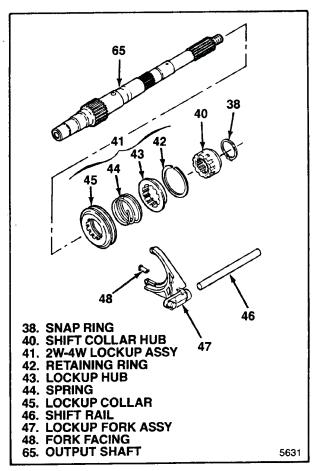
Lockup Shift Parts (Mechanical Shift)
